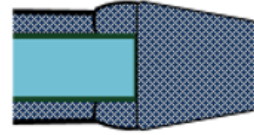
Boxing weld type of fatigue specimen
